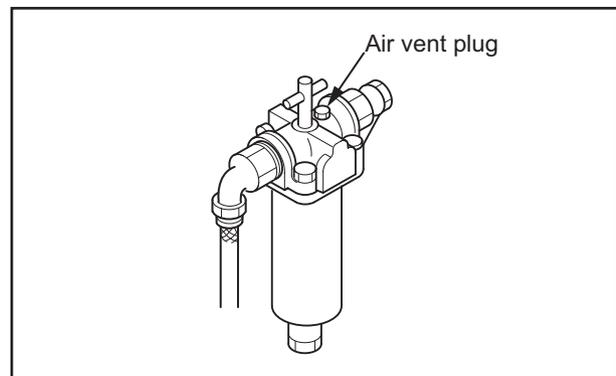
Fuel filters (wire-element type) - Bleed air
